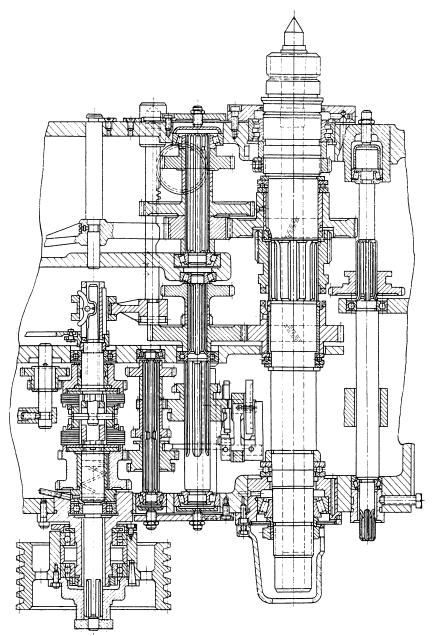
Development of the speed gearbox of the model 1A62 lathe
